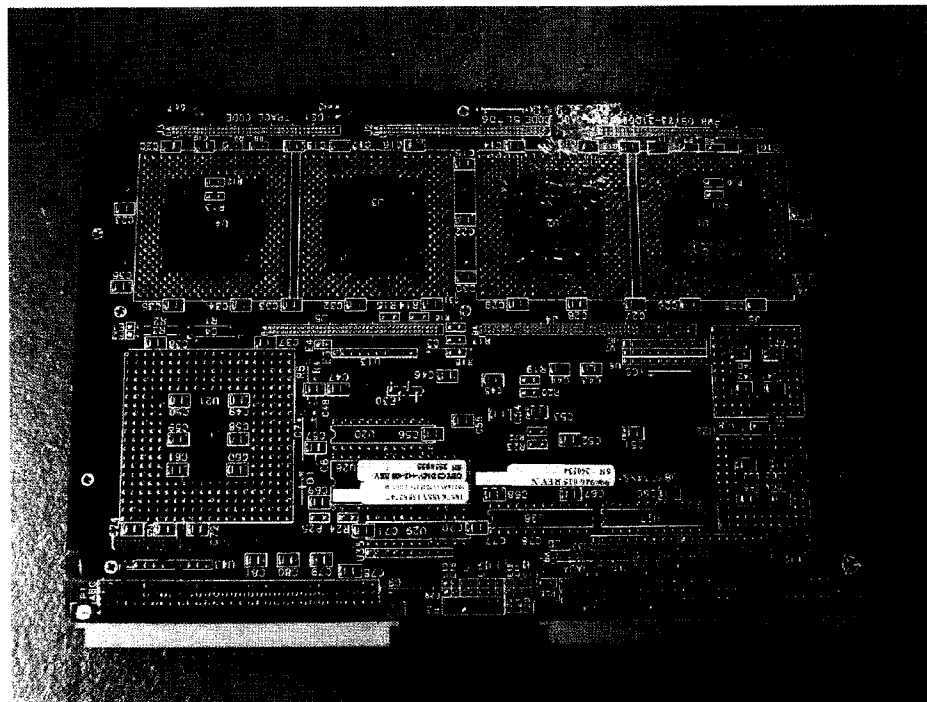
CCA Utilizing Combined PWB Core and External Frame Cooling Scheme (Solder Side)
